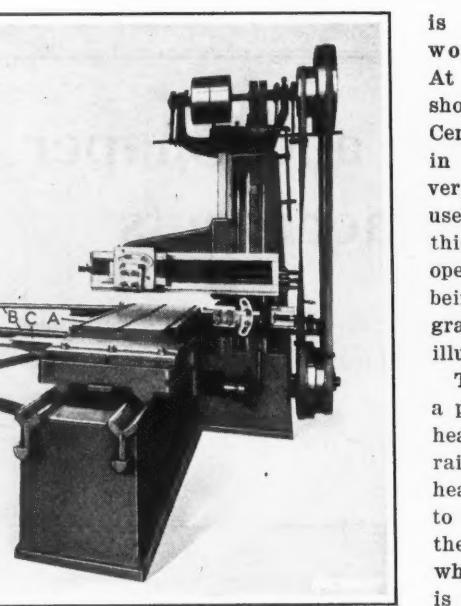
Open-side Planer equipped with the Radius Attachment shown in Fig. 2
